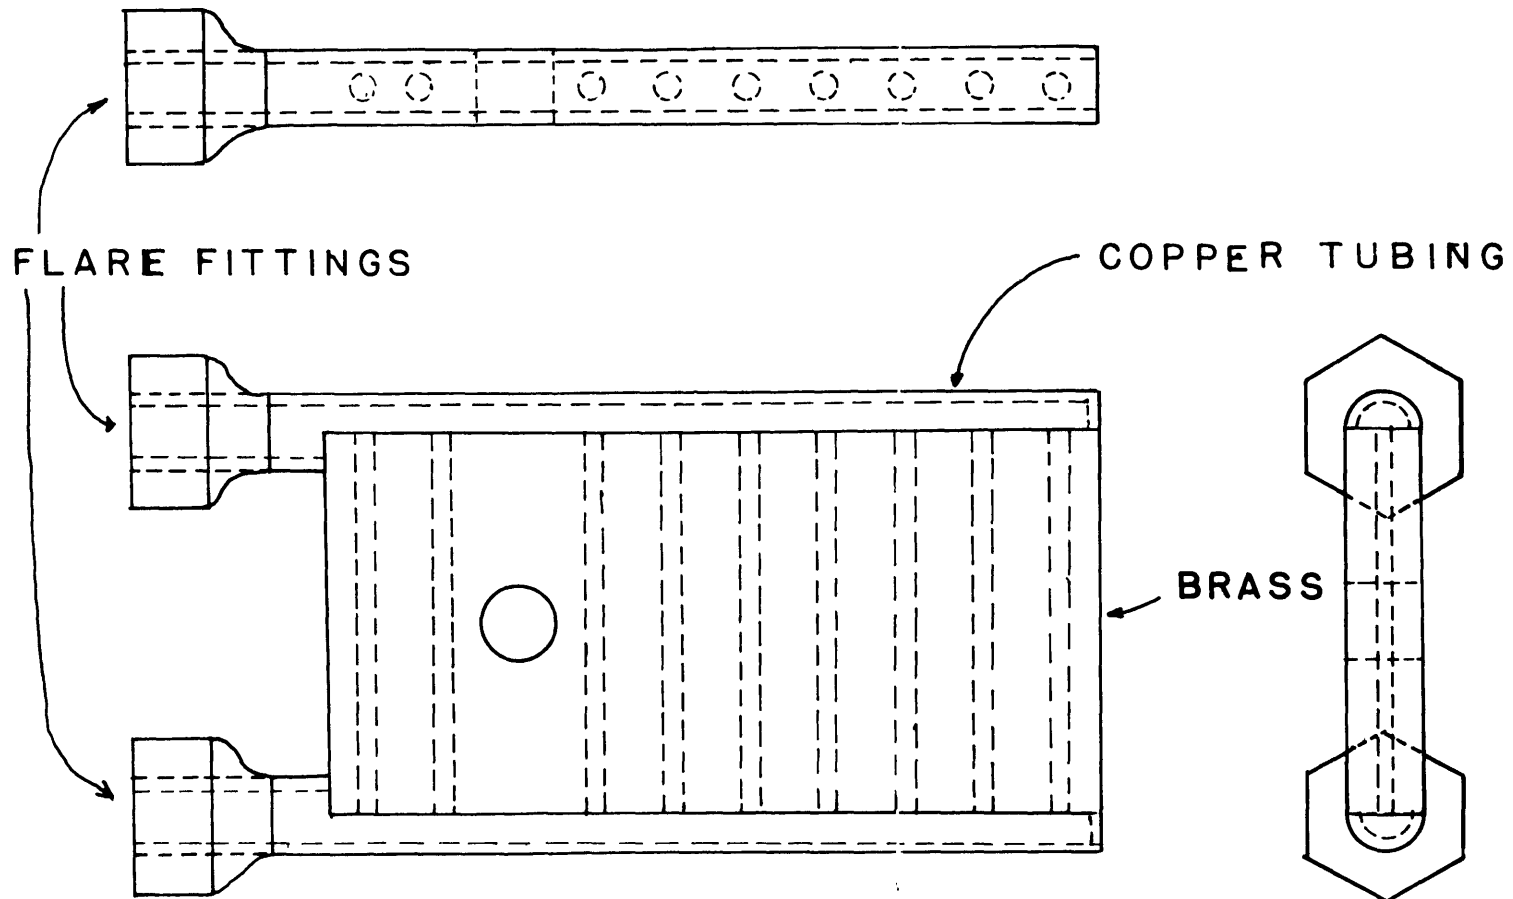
GUARD COOLER FOR TEST SECTION INLET
